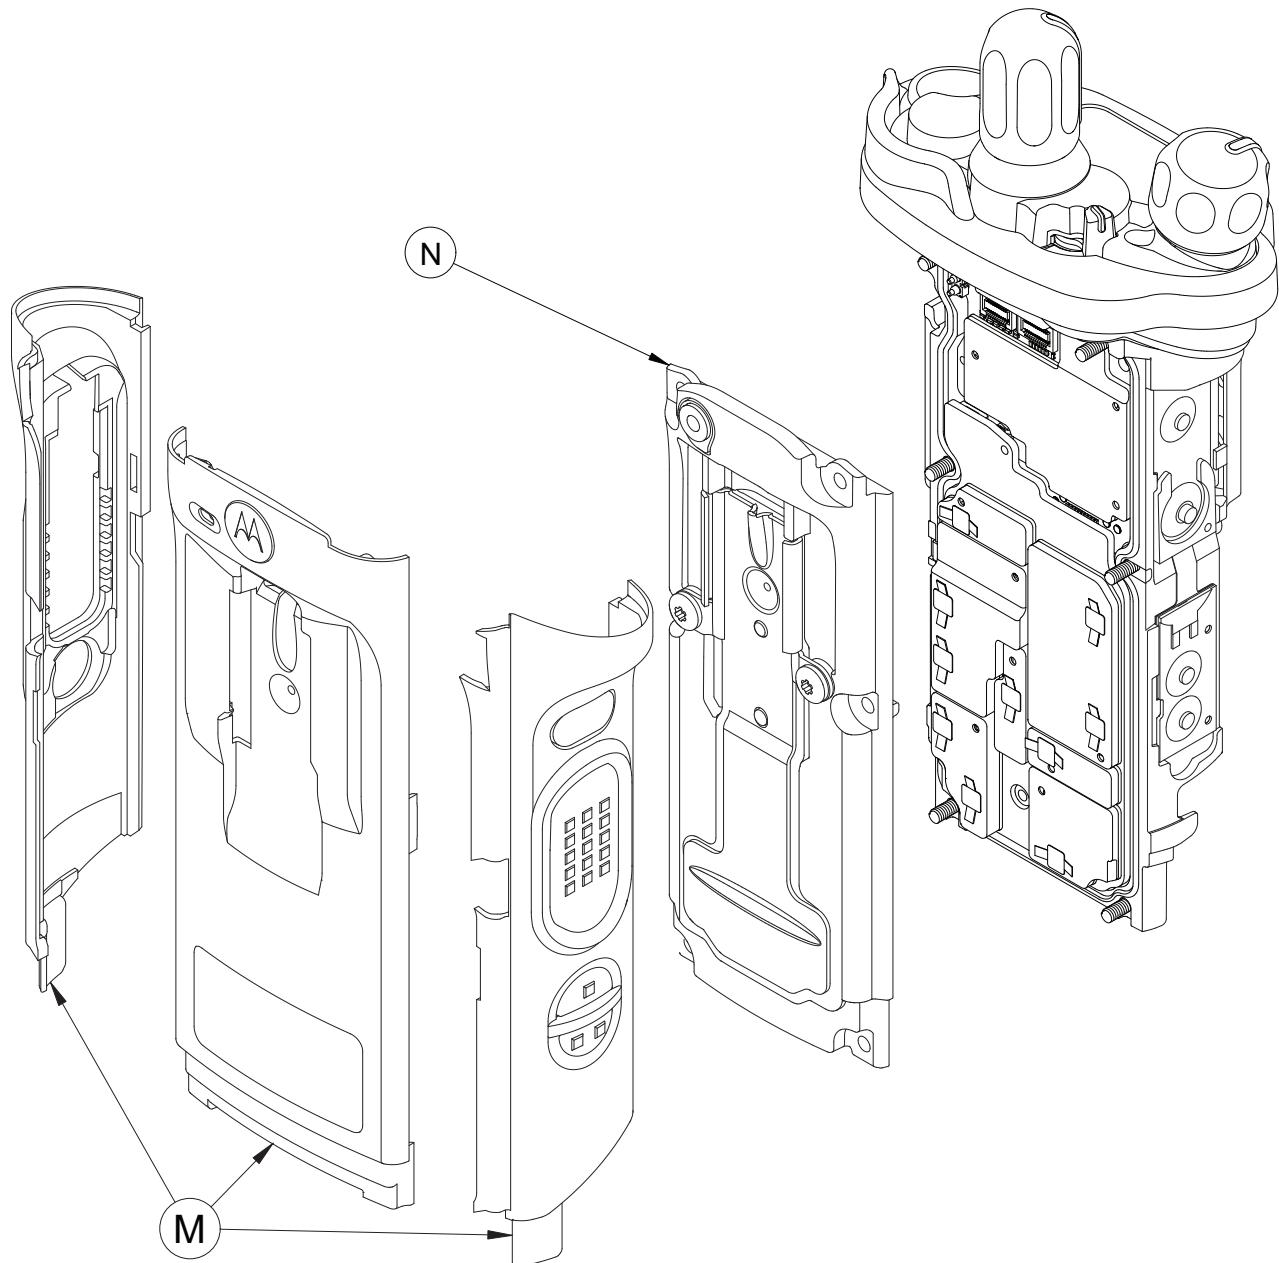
APX 6000XE Top Display Partial Exploded View
